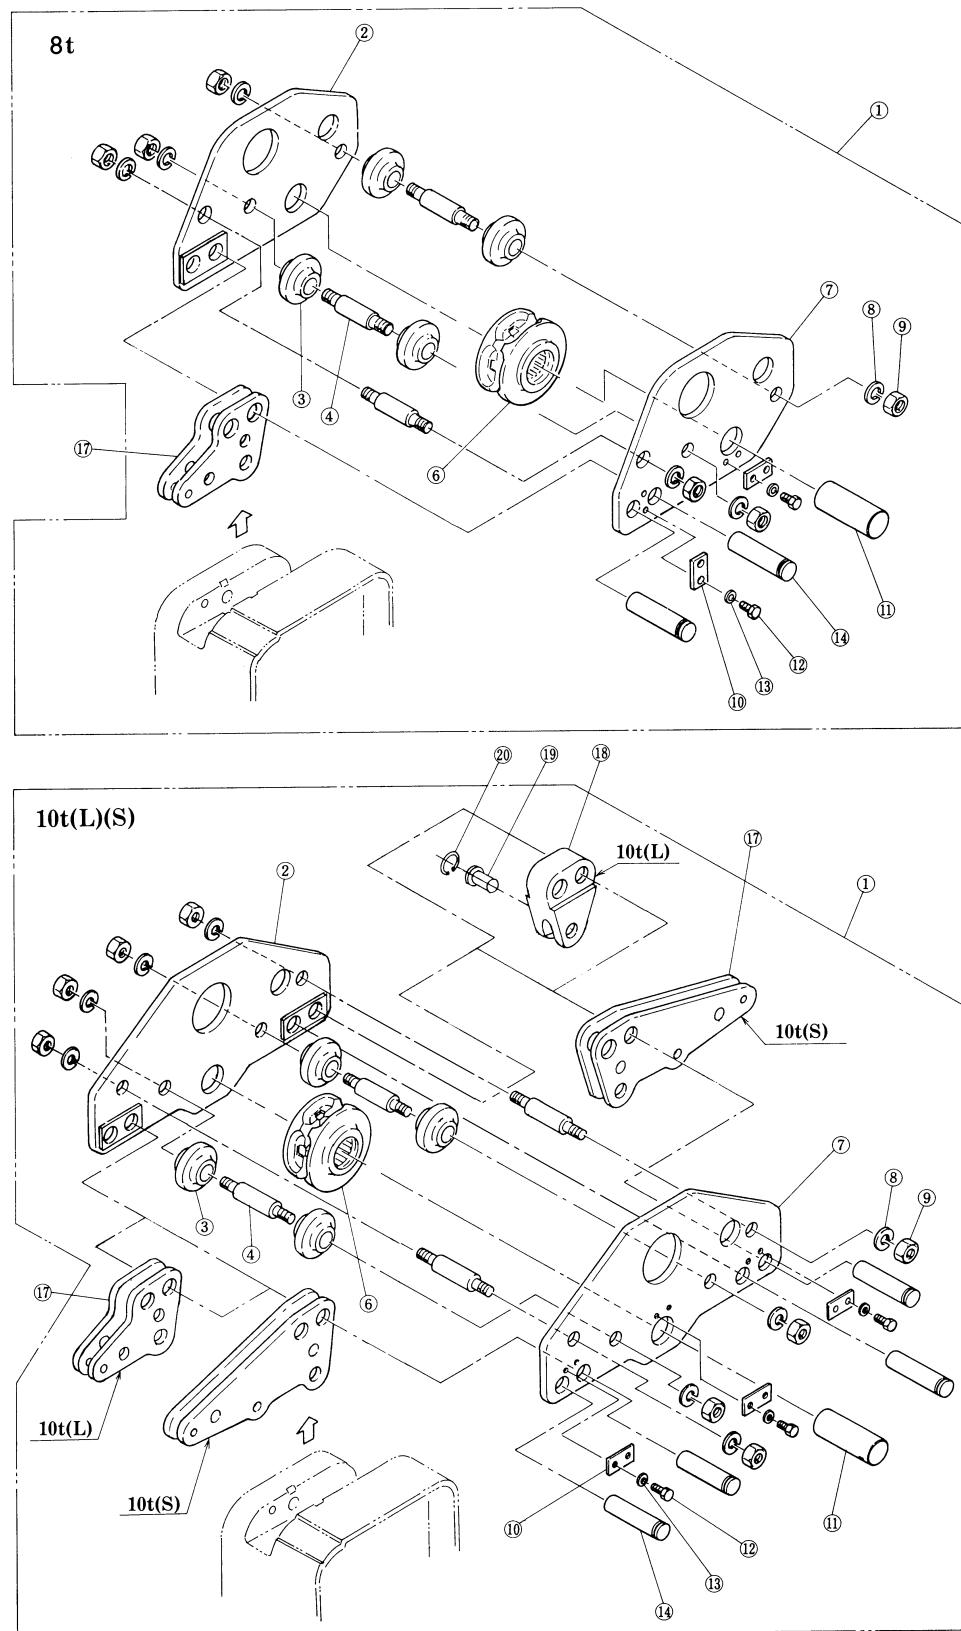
Top Suspension Plate Parts 8 & 10 Ton
